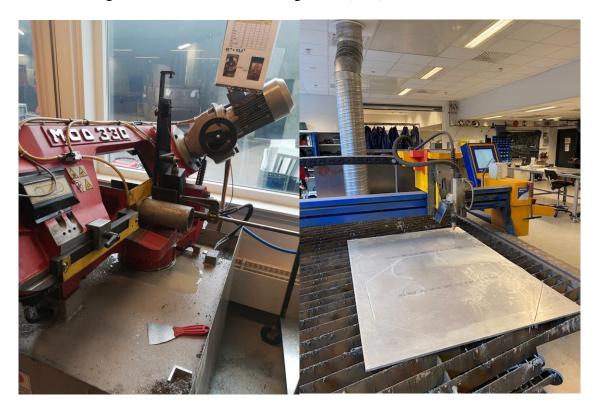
Hacksaw (Left) and CNC Plasma Cutter (Right)
